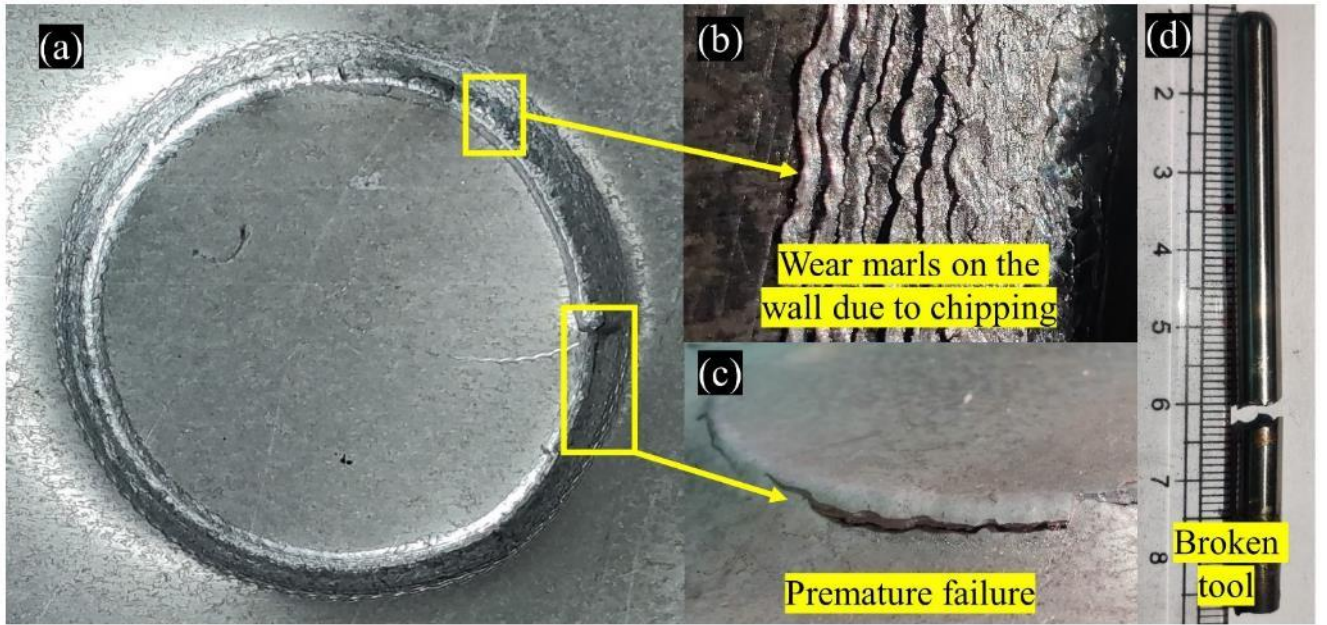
(a) formed sample using 6 mm tool diameter, (b) wear marks due to chipping, (c) Crack formation and (d) broken 6 mm forming tool
